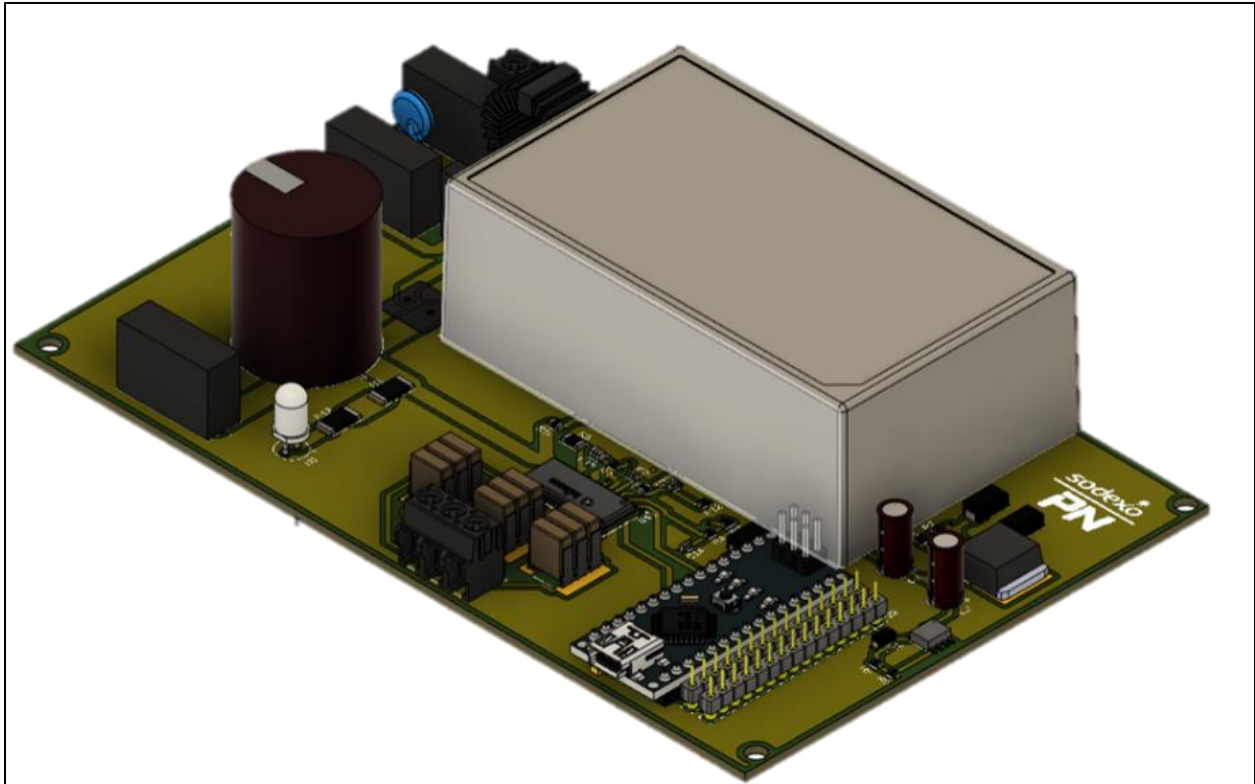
3D PCB of Conveyor Electrical System
